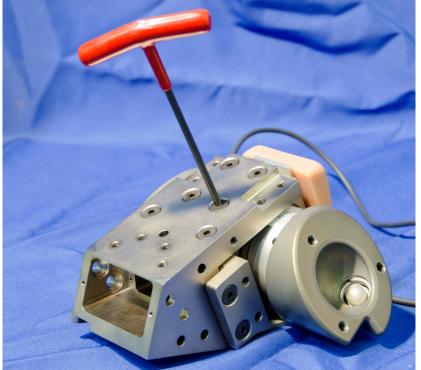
Secure pelvis base module to bottom of pelvic box assembly
